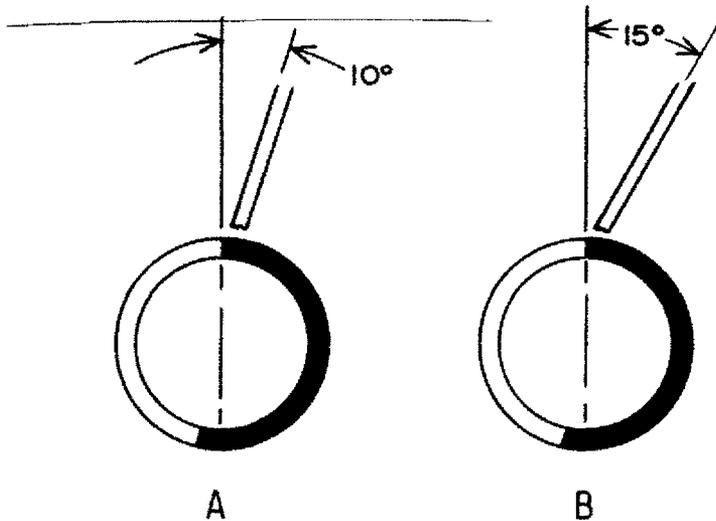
Correct electrode angle for flat welding at the top of the pipe.
